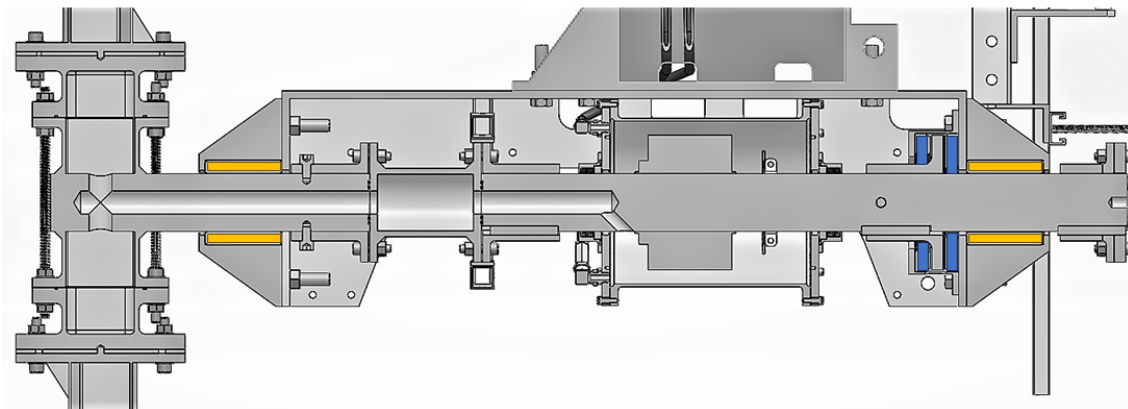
CAD drawing of the RRES drive train with location of journal (yellow) and thrust (blue) bearings highlighted.
